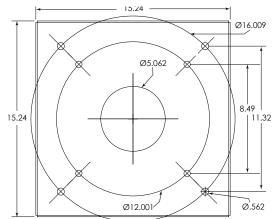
B -LNB 1000 Mounting Flange (Welded)
